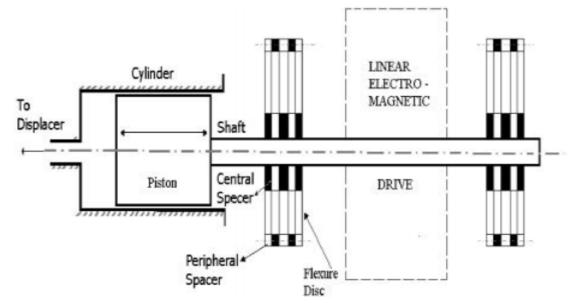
Cross section of a flexure bearing linear motor piston drive.
